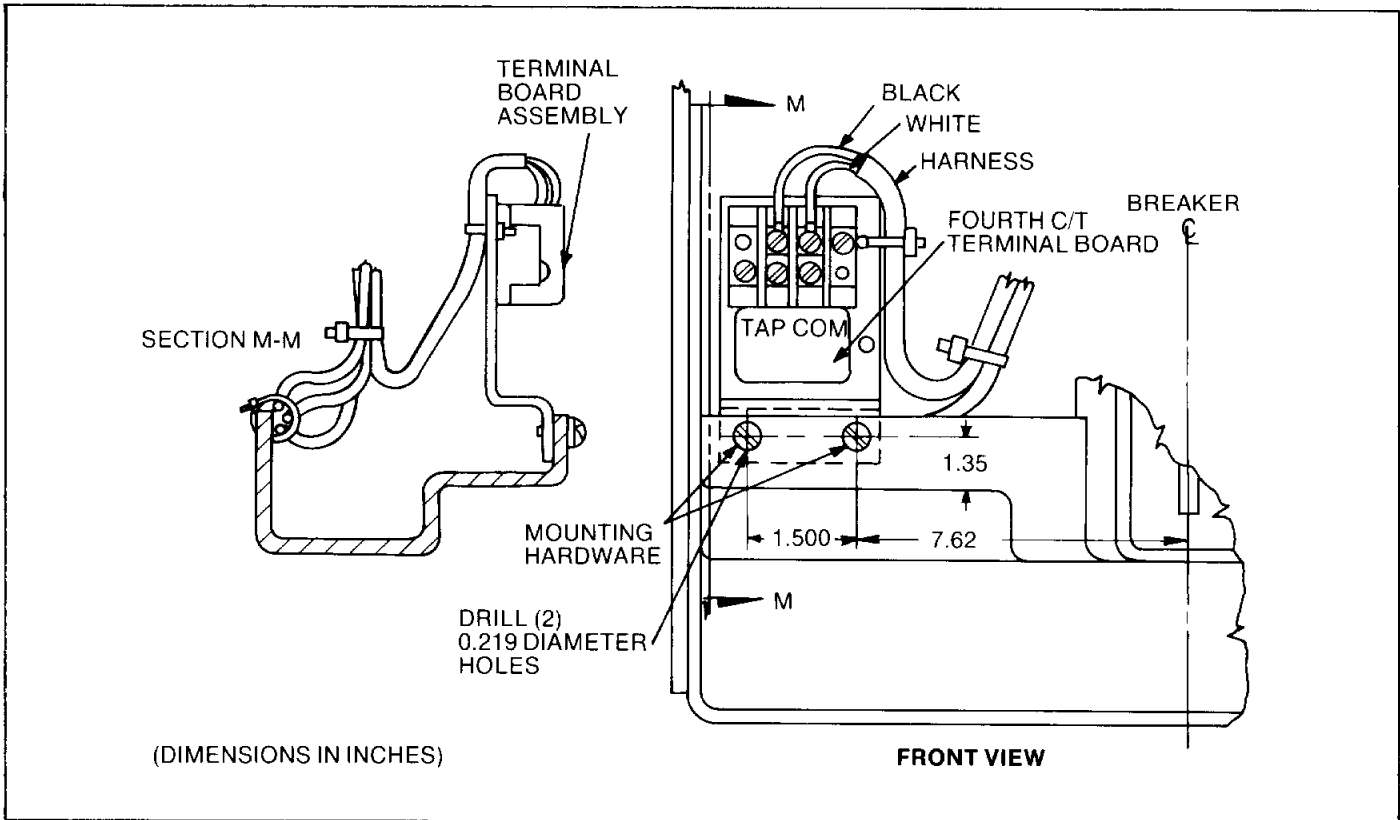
4th-wire terminal board installed — AK/AKS-50 stationary
